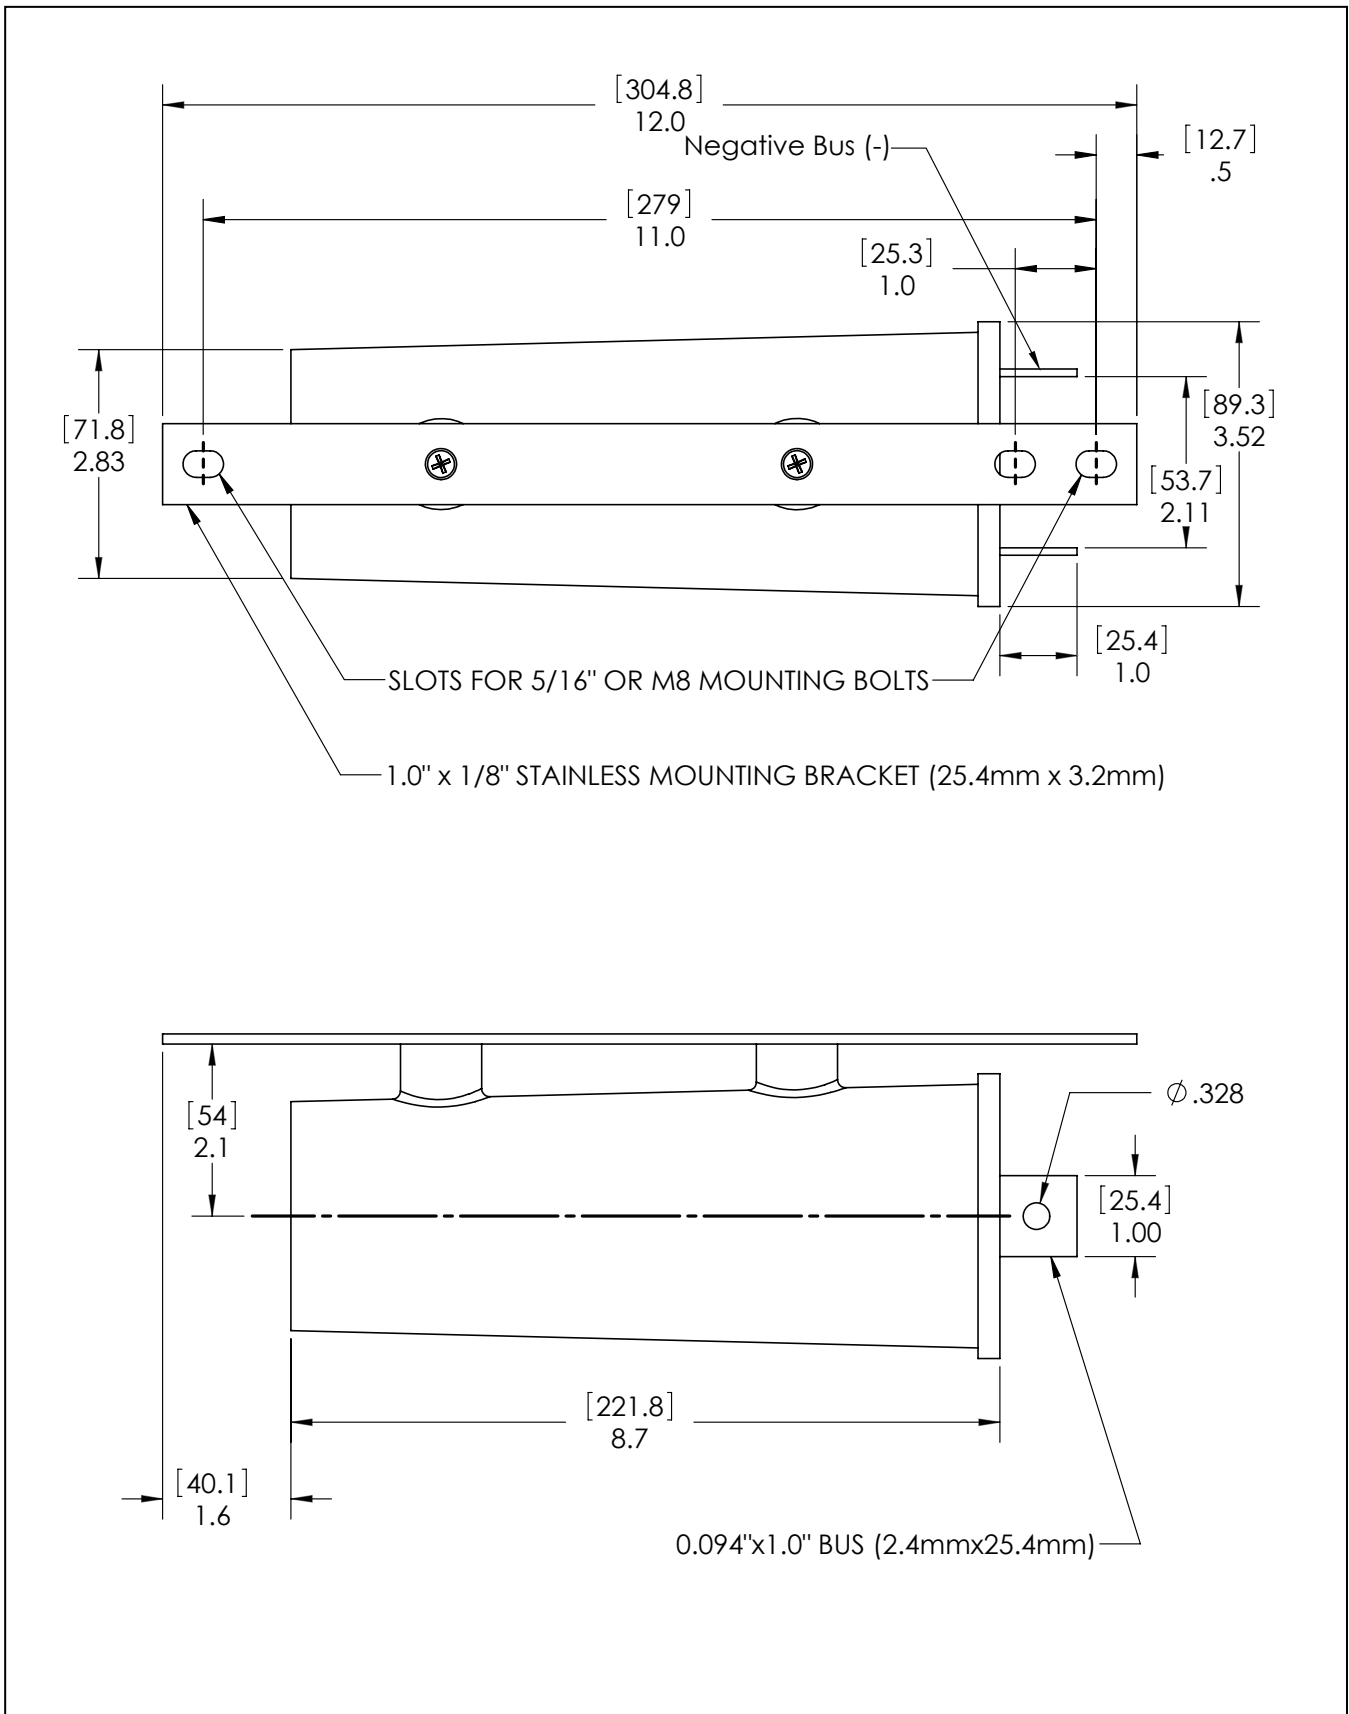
SSD Outline Drawing (Optional Terminal Arrangement)
